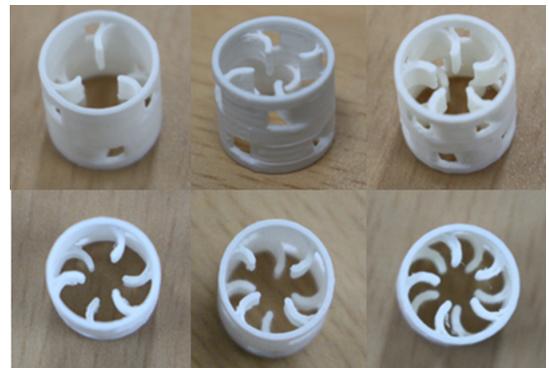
Pall rings made by a 3D printer. Raw material is ABS resin.
